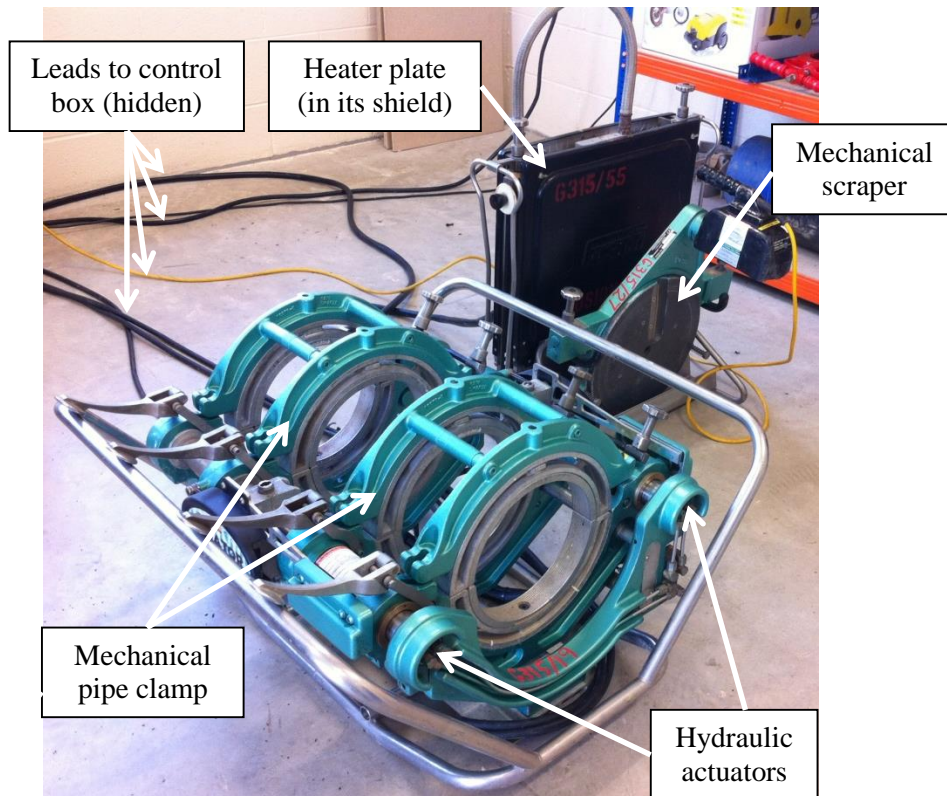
Fully-automatic buttfusion welding machine
